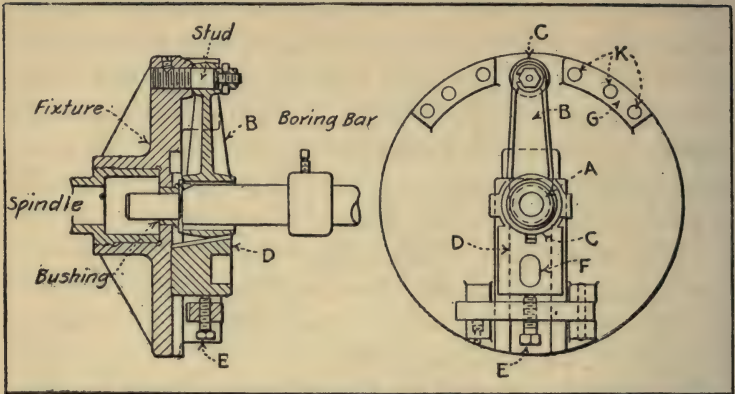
COUNTERBALANCED FACE-PLATE FIXTURE FOR A CONNECTING ROD
